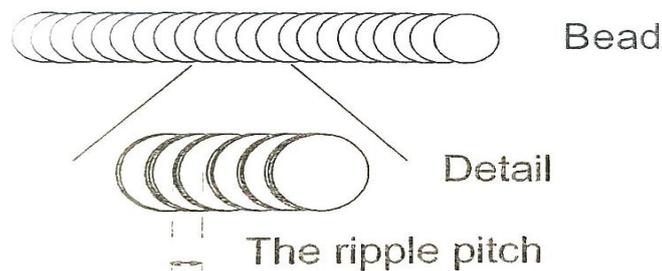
Robotic welding bead profile for tab welding with pipe ends.
